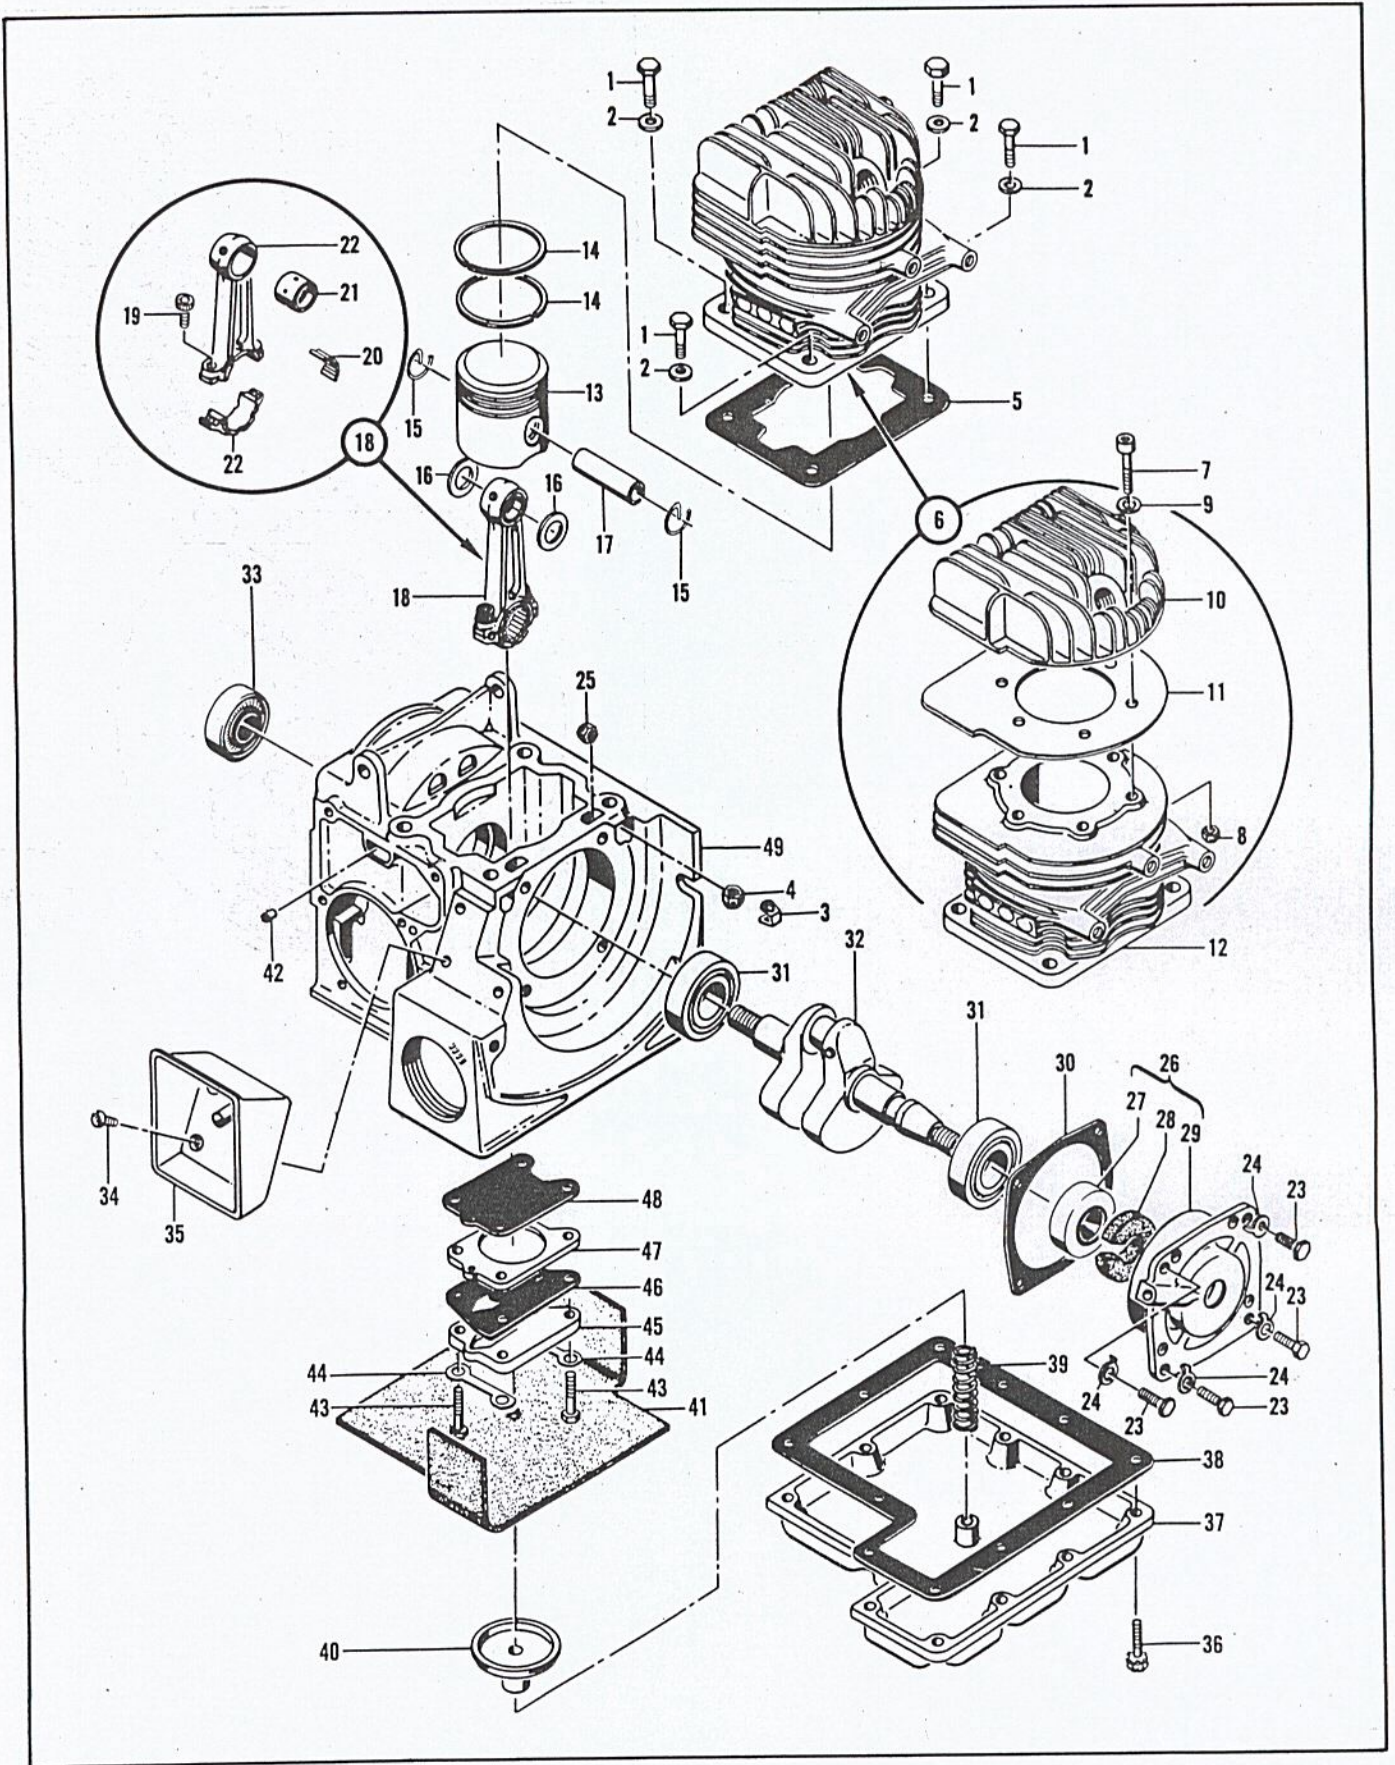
Crankcase, Crankshaft, Cylinder and Piston
